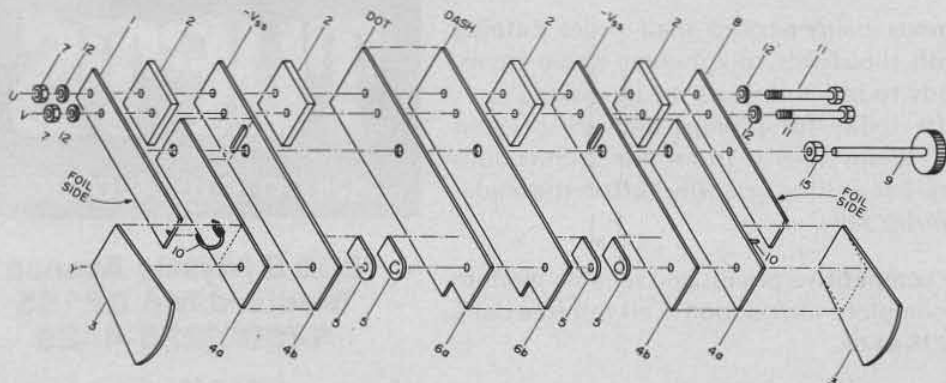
This "explosion drawing" shows how the many parts fit together.
